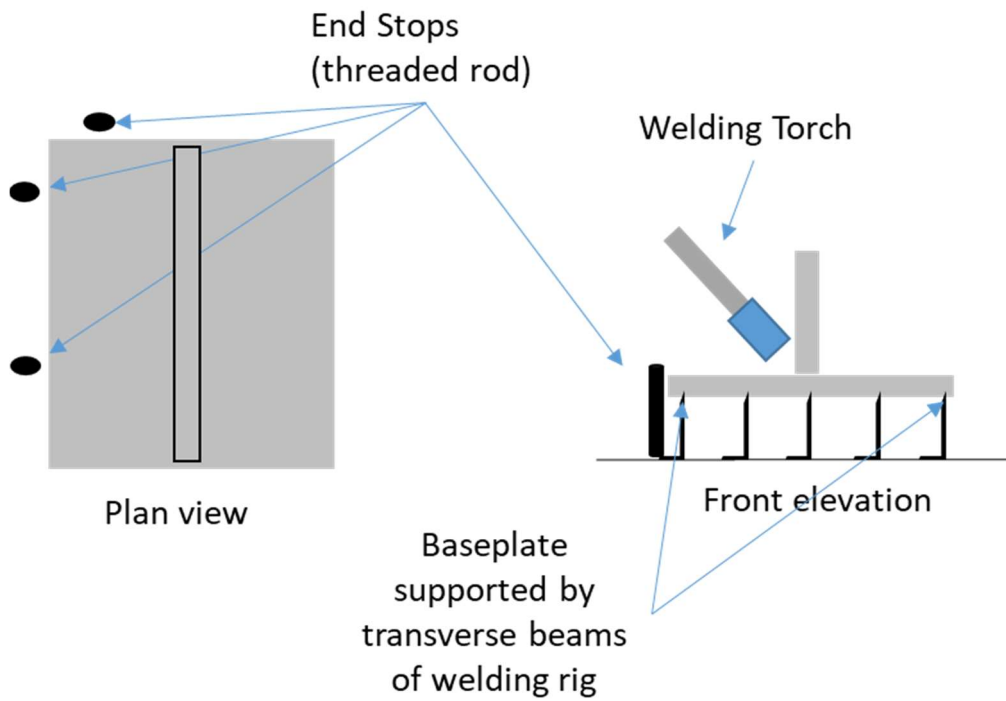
Schematic showing how fillet assembly was supported on the rig during welding
